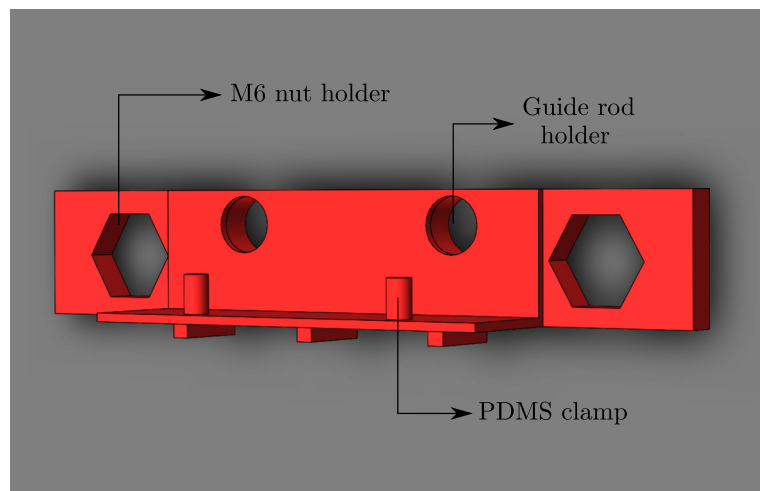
CAD model of the membrane holder. It has extrusions to constrain the motion of the membrane. Pillars make the clamping and removal of the membrane easy and safe.
